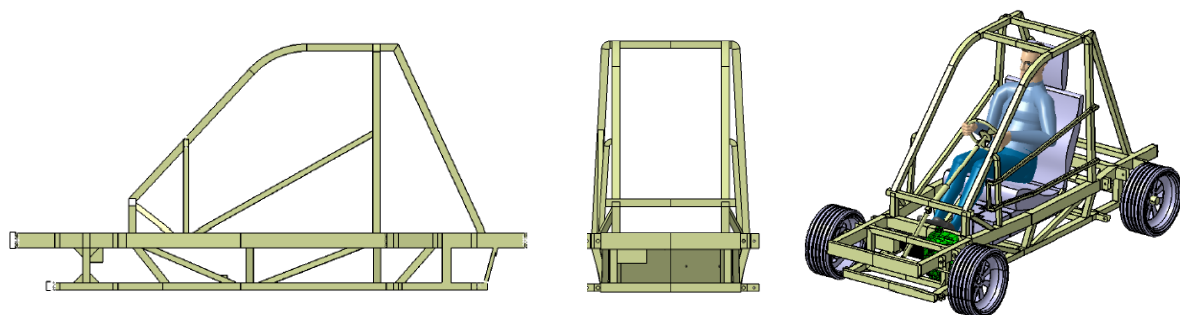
PUNCH frame side view, front view and perspective view by CAD (Riazi et al., 2010)
